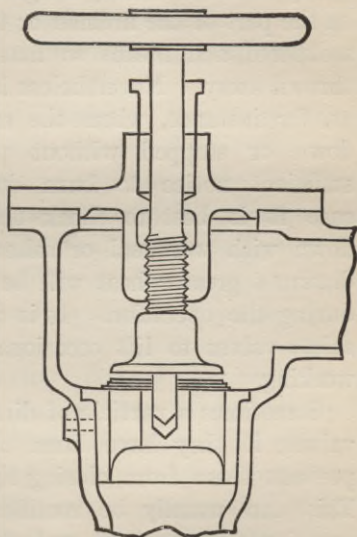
Feed Check with Kinghorn's Multiplex Valve.
